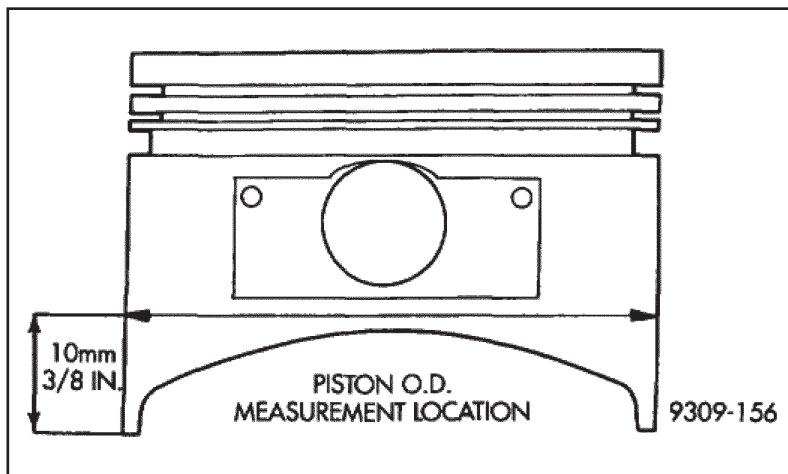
Measure the skirt clearance above the bottom of the piston skirt on Chrysler 2.7L engines.
